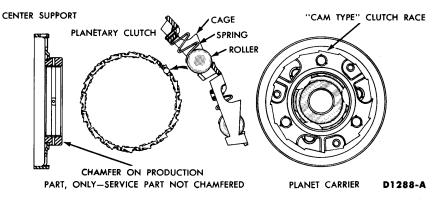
Planetary Clutch, Planet Carrier and Center Support
